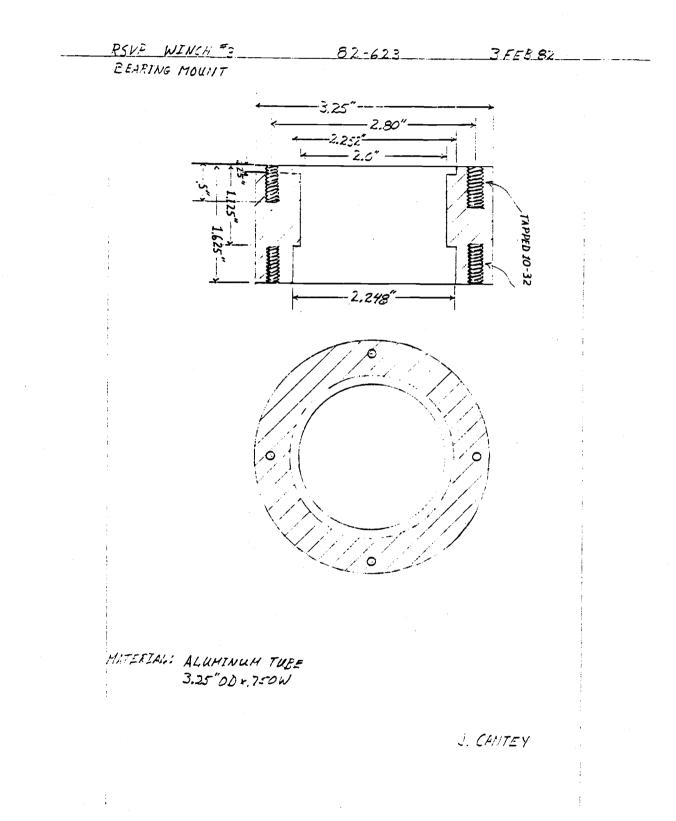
Bearing mount (dwg no. 82-623).
